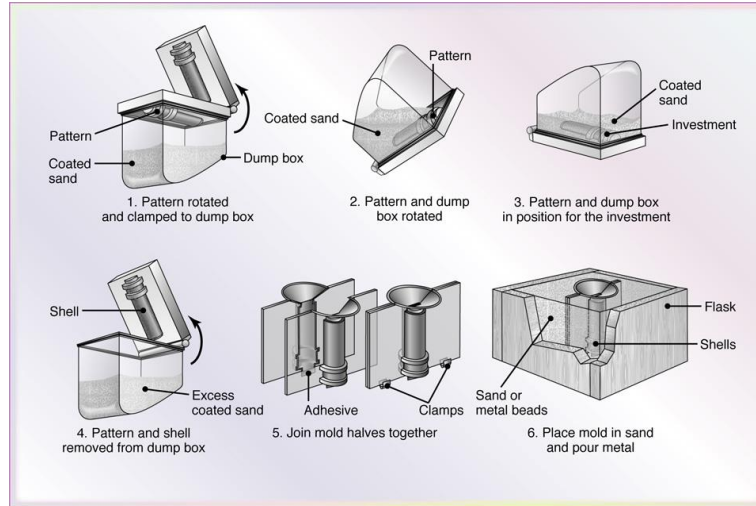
The shell-molding process, also called *dump-box* technique.
